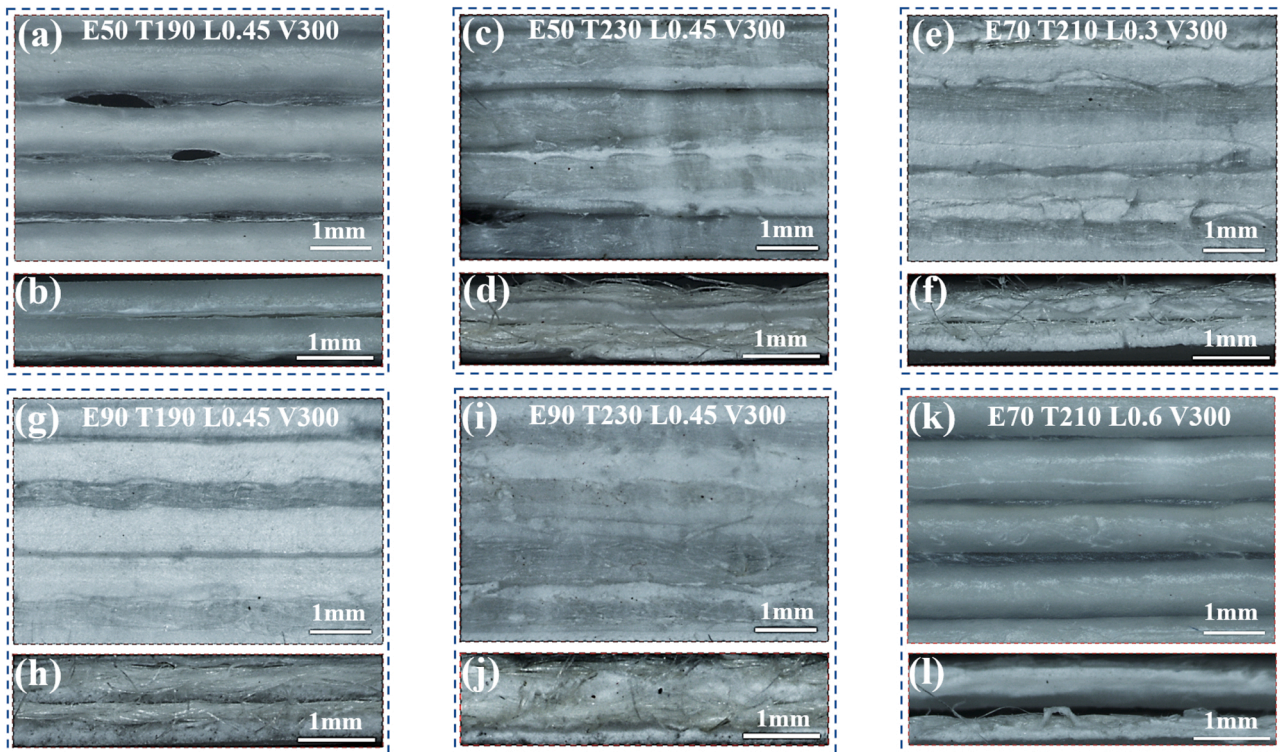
Fracture surfaces of CFRRPP prepared under different printing parameters.
